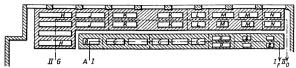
LINE-PRODUCTION OF MAIN SPINDLE
